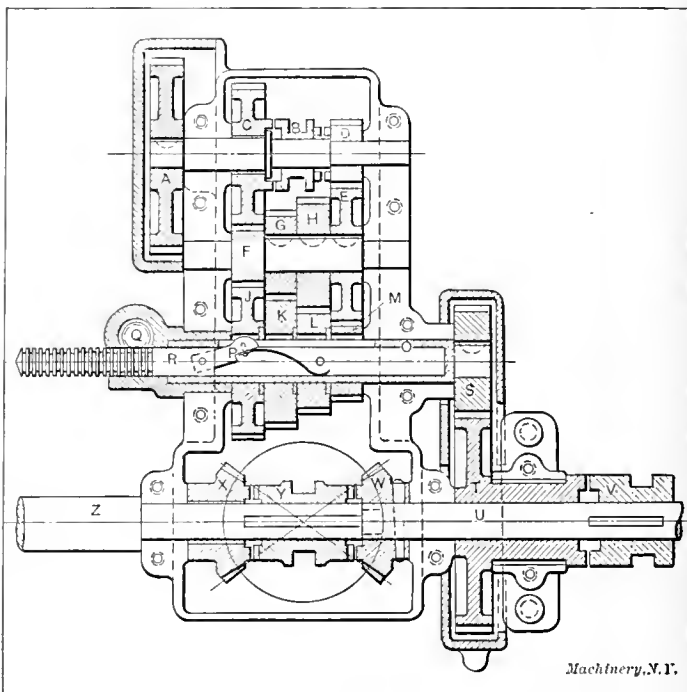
Arrangement of Gears in Quick Feed Change Mechanism
